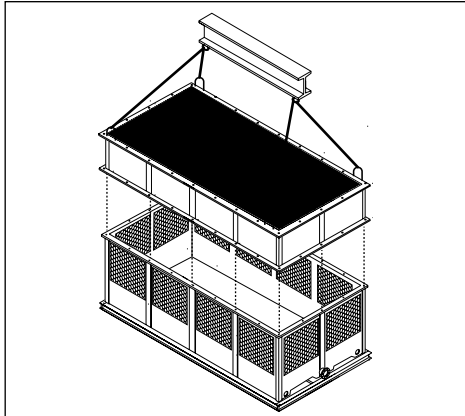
Lower body installation for a Two Fan Tower (RT-D or RTP-D)
